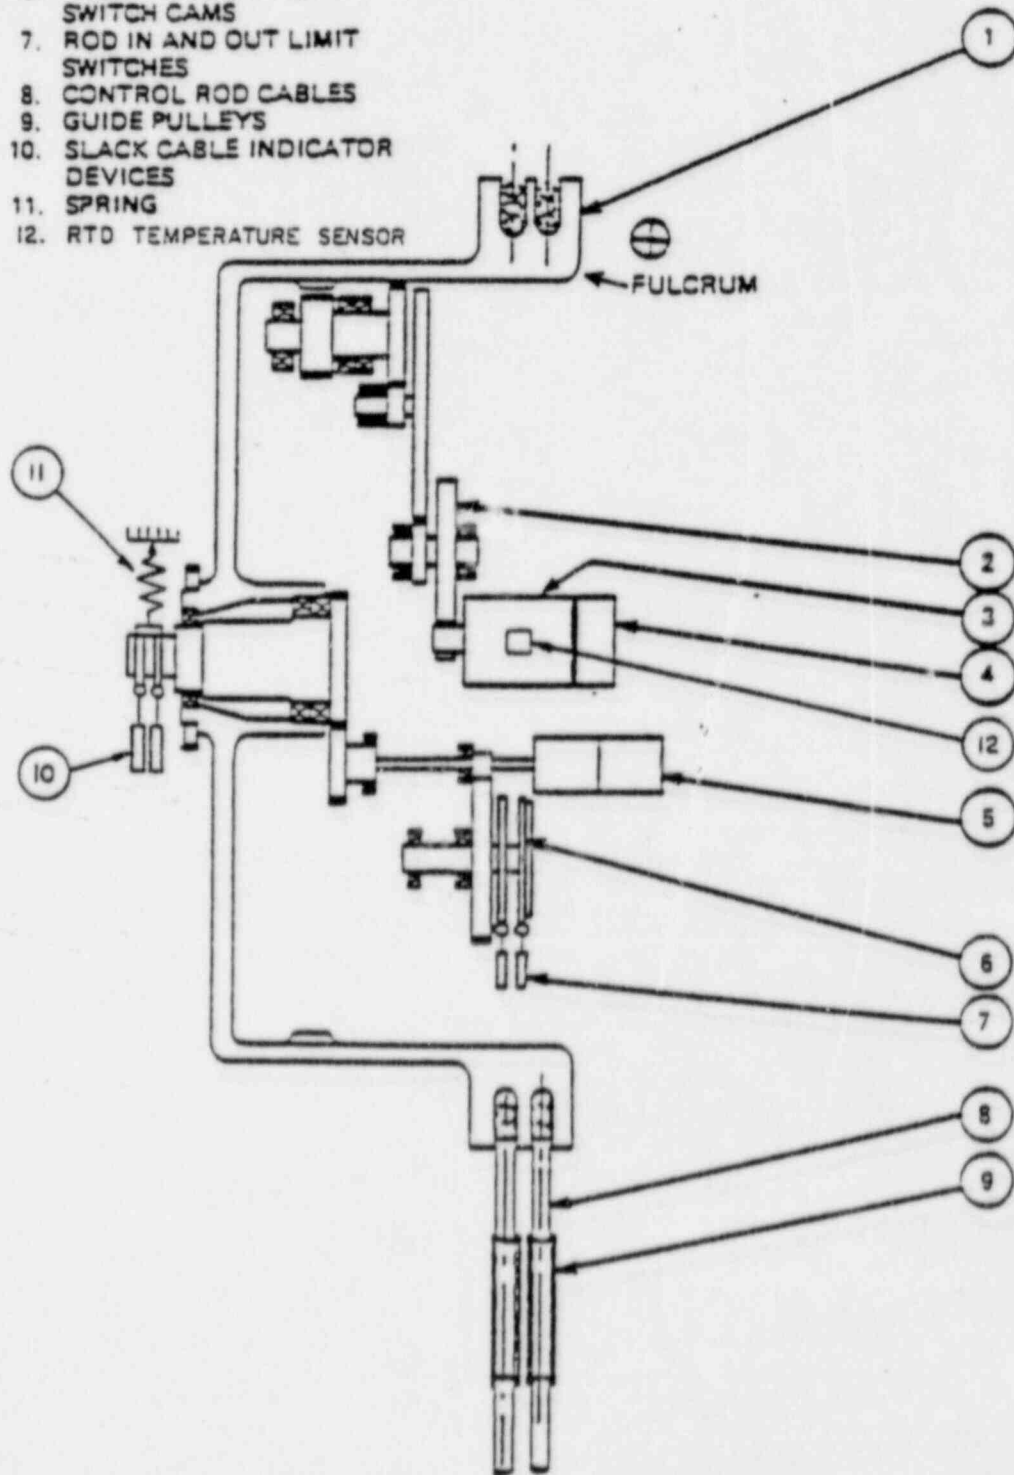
Control Rod Drive Mechanism Schematic
